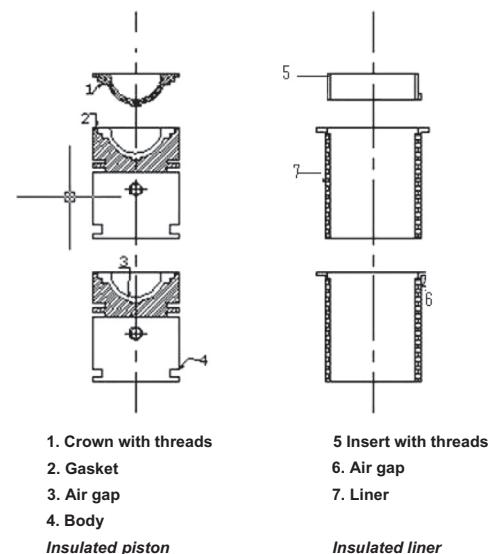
Assembly details of air gap insulated piston and air gap insulated liner.
